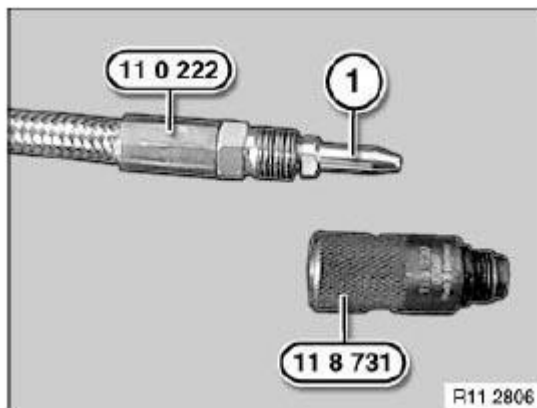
Identifying Special Tool (11 0 222) And (11 8 732)
